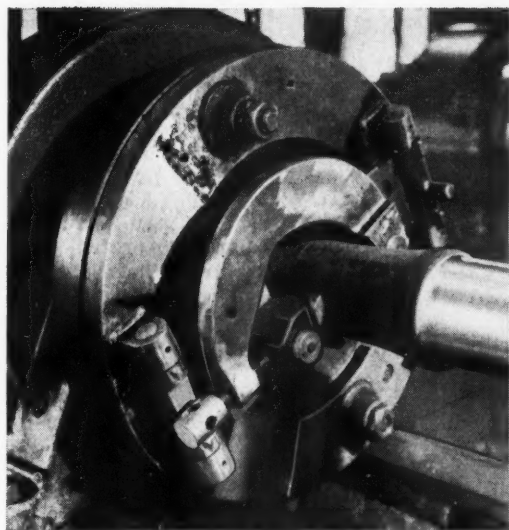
Driver for use in remachining axles. The clamping device consists of a C-shaped clamp mounted on a sliding jaw.
